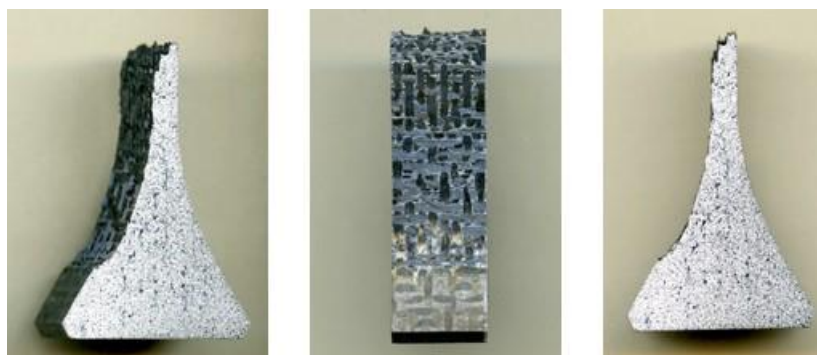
Photographs of Failed Subelement Dovetail Section For Stepped Fatigue (15-544)
